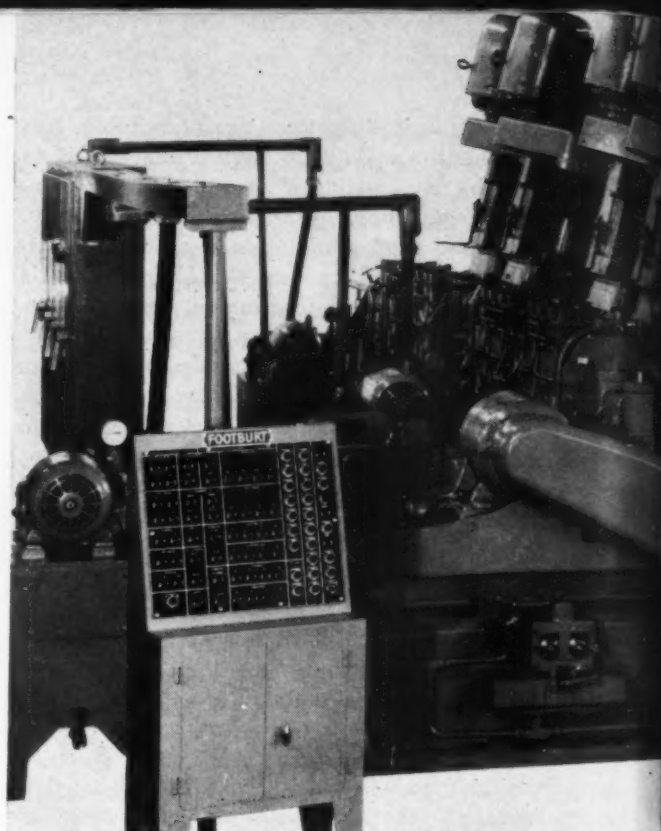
Above—Compact mounting of all controls for an automatic machine. Controls of this type, mounted and wired in the cabinet may be more economical than mounting the controls on the machine
